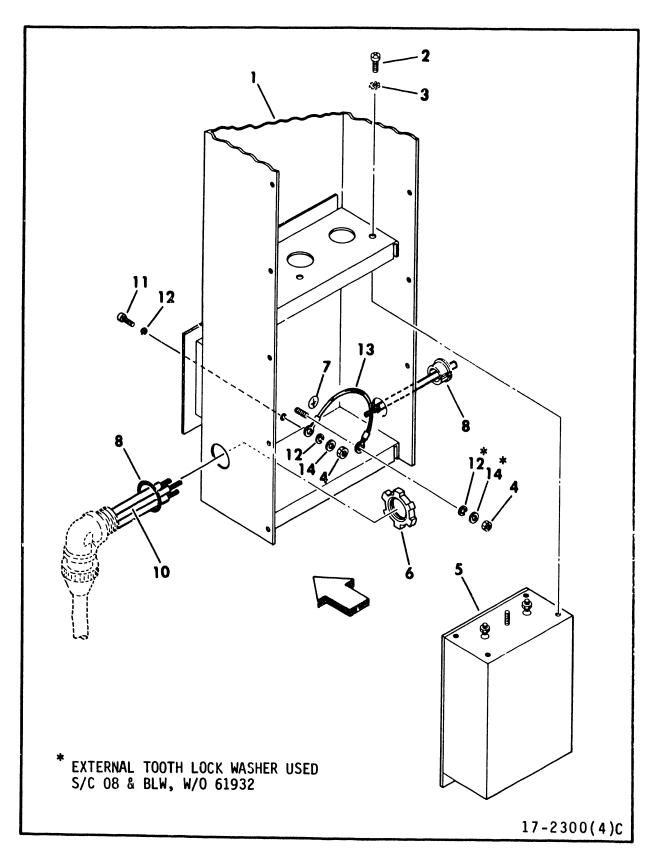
A-23. AC Power Supply Assembly (Sheet 4)
